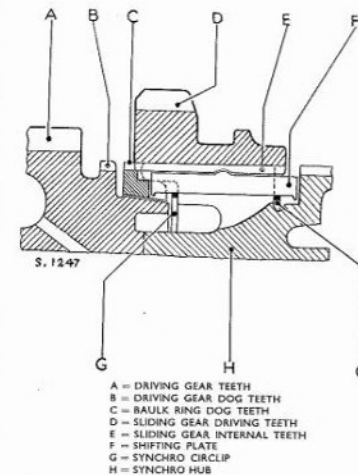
Sectional view of the first and second synchronising hub assembly
